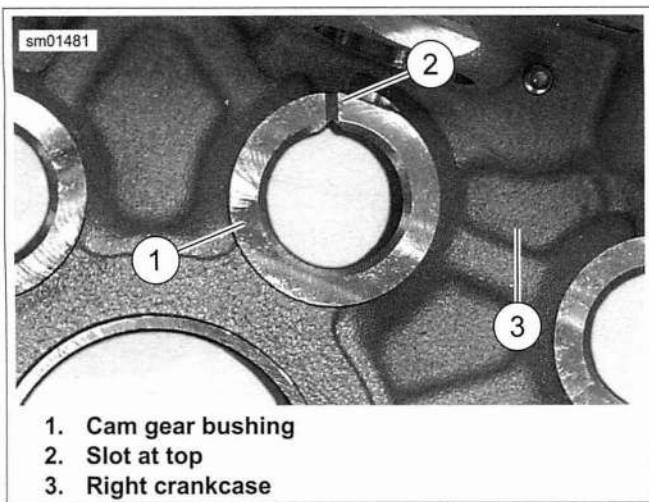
Cam Gear Bushing Installed in Crankcase
